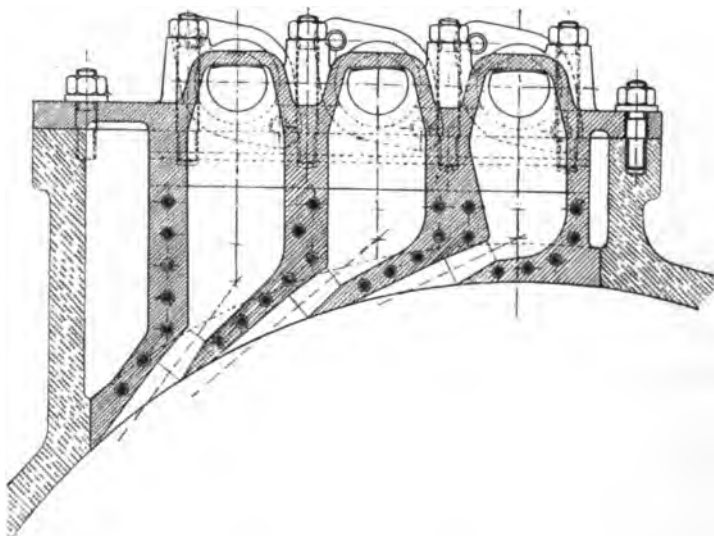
Steam-admission Ports and First-stage Nozzles of Union Steam Turbine.
